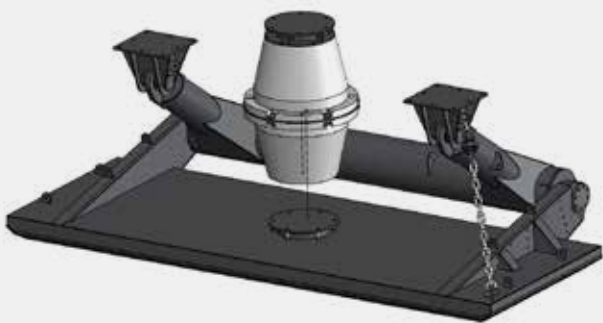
Installing "back-to-back" SCN fenders on steel panel of the PMF unit
